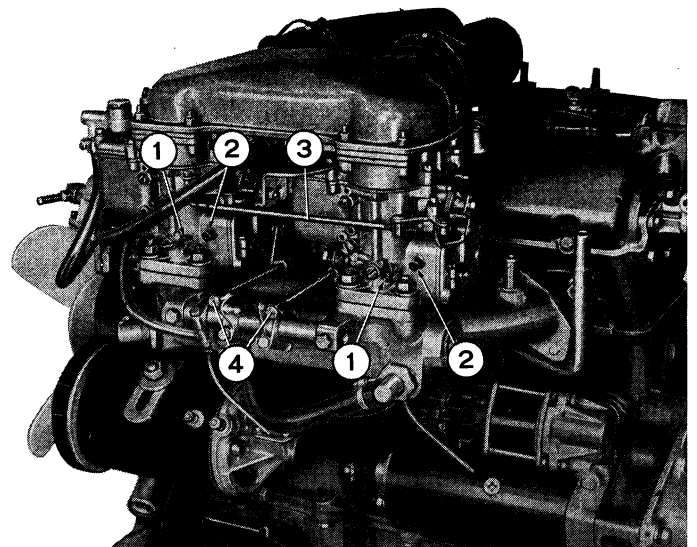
Weber 34 DCS 2 and 34 DCS 4 carburetors in place on engine 118 B.000.
